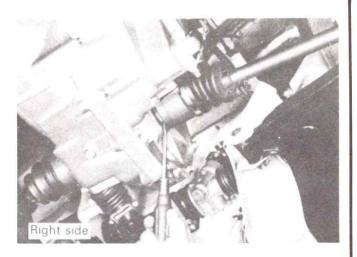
Prising out the driveshaft from the transmission housing (Sec 3)
